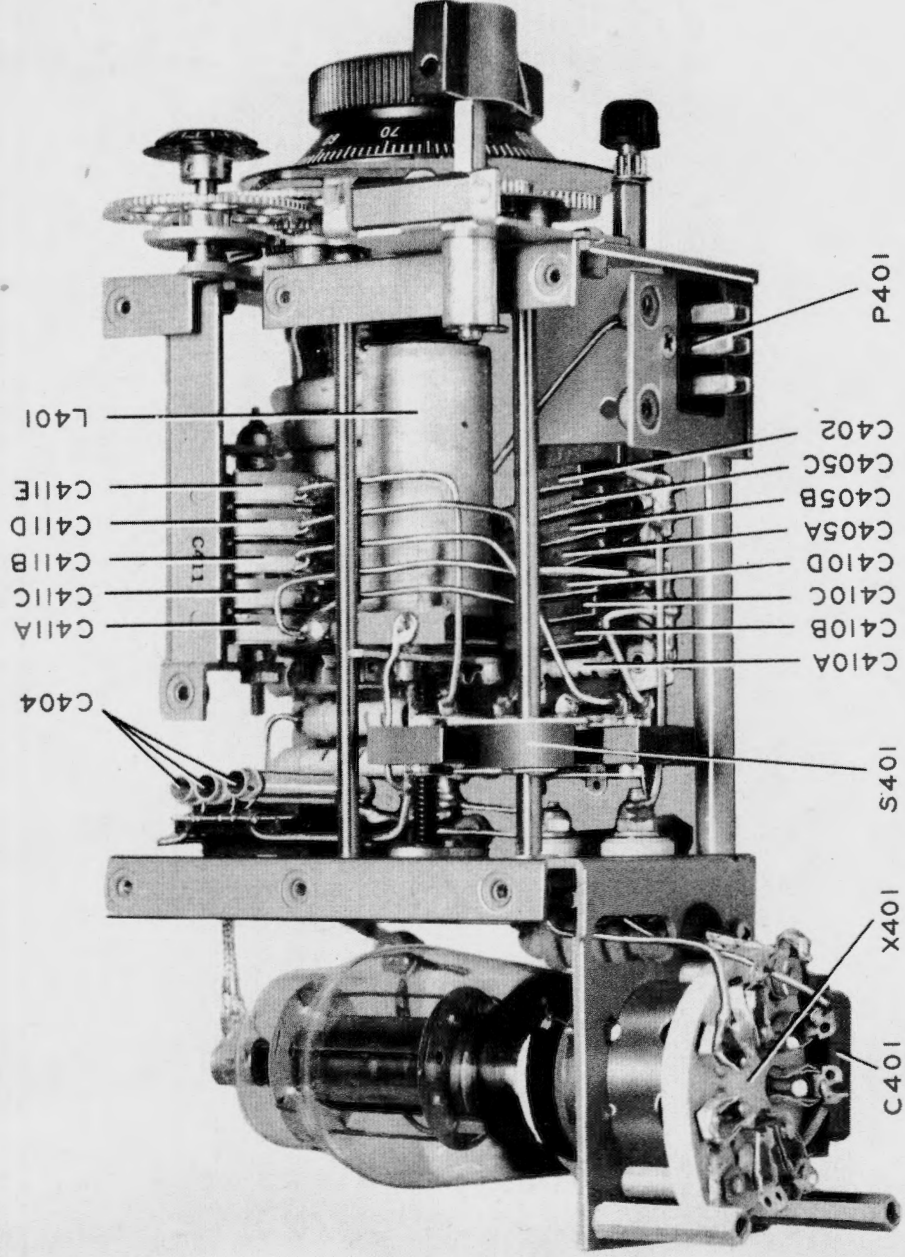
Low Frequency Oscillator Unit - Bottom Open View
